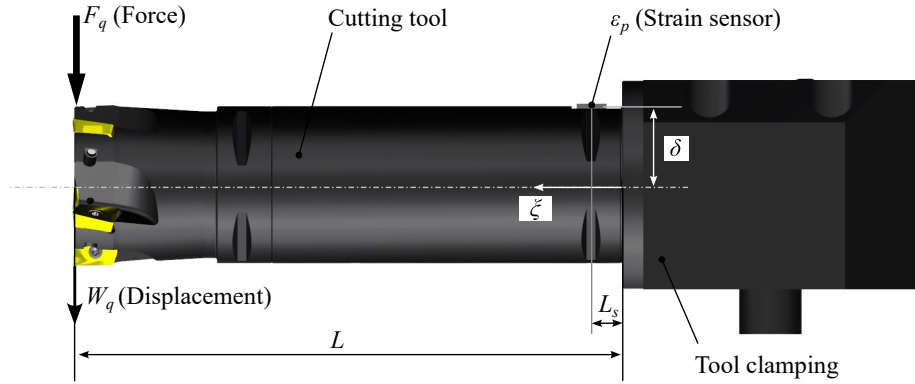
An illustration of cutting tool (R390-066C6-18M060) with the extension adapter (C6-391.01-63 140A) and tool clamping (C6-RC2090-42060), equipped with a piezoelectric strain sensor.
